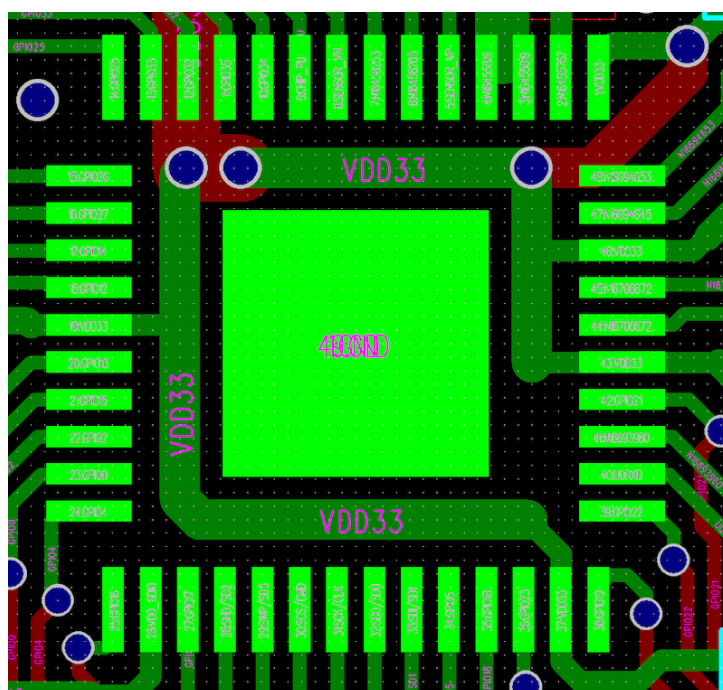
ESP32 Power Traces in a Two-Layer PCB Design
